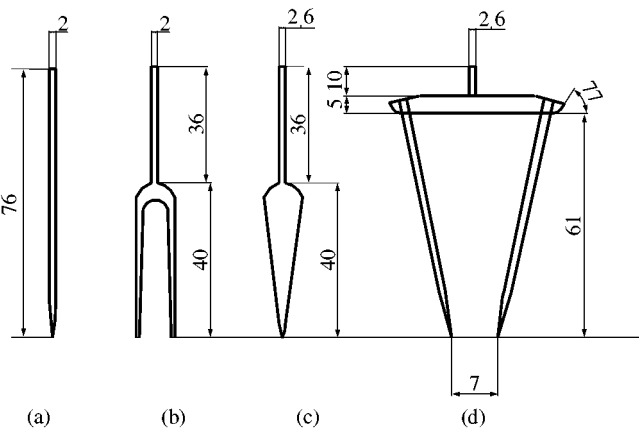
Shape and dimensions of the fingers developed: (a) needle I; (b) fork; (3) shovel; and (4) needle II; all dimensions in mm
